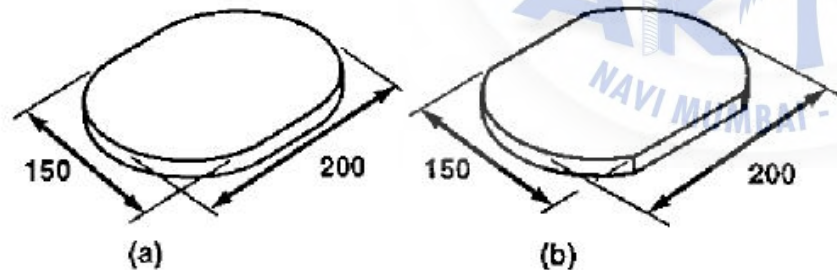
Sheet metal part (dimensions in mm). (a) Blanking design. (b) Part-off design.
